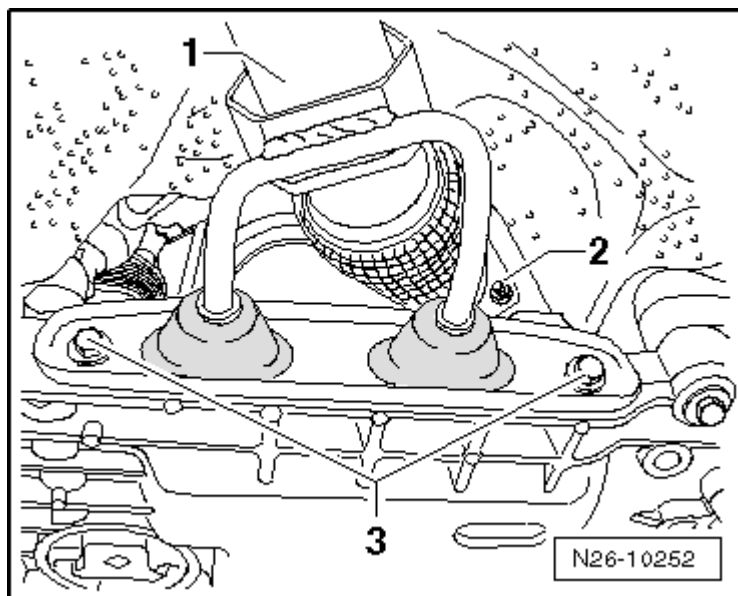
Identifying Front Exhaust Pipe, Nuts & Bolts
